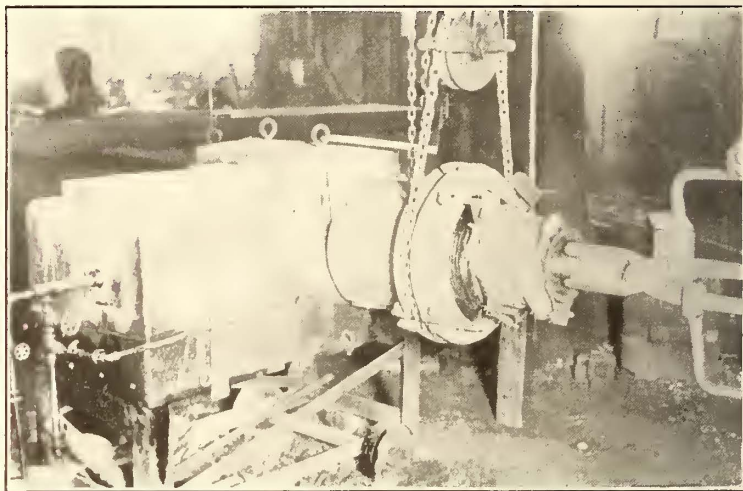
San Francisco Welding—Complete Armature with Broken End in Oil Furnace
